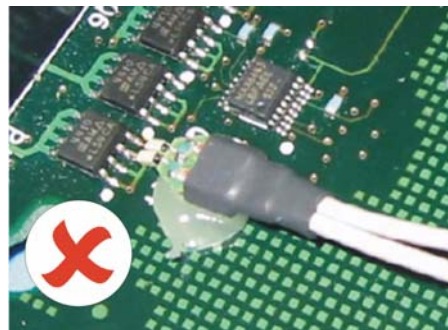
Incorrect securing method because glue is placed on the probe head tip
